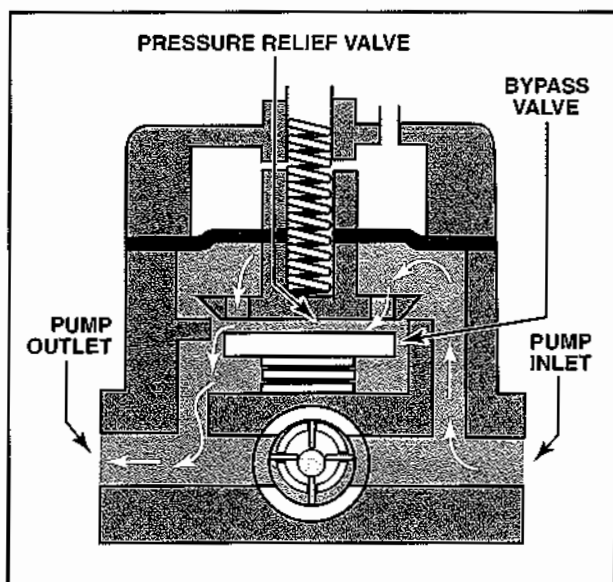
On engines that use both an engine-driven pump and a boost pump, a bypass valve is typically installed in conjunction with a pressure relief valve. When boost pump pressure exceeds engine-driven pump pressure, fuel flows directly to the engine.
